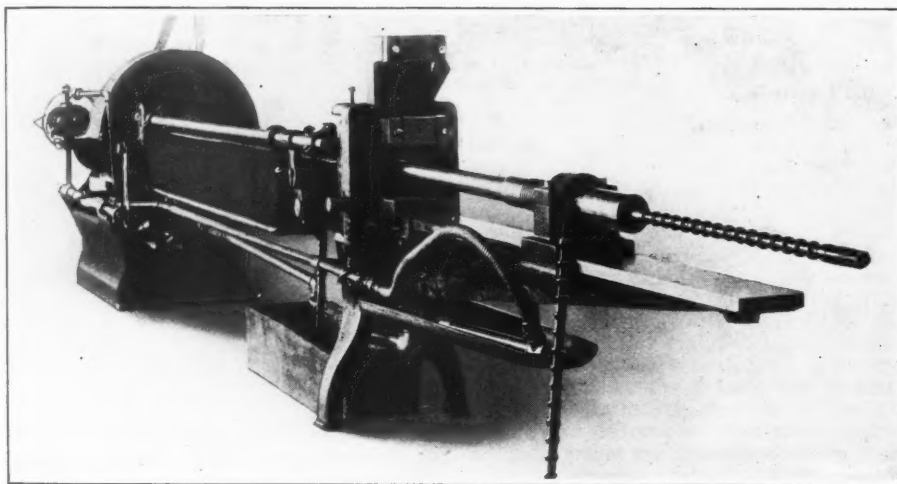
Special Broaching Machine with Fixture and One-pounder Gun in Place Ready for broaching Rifling Grooves
